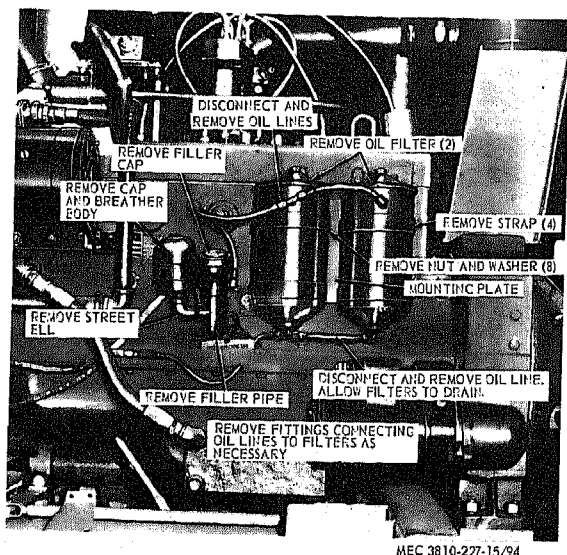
Crane engine, oil filters, crankcase filler, and breather, removal and installation.
